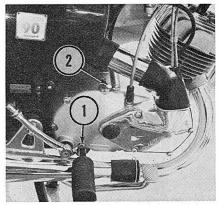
View of right side showing gear box oil level screw (1) and filler plug (2).
